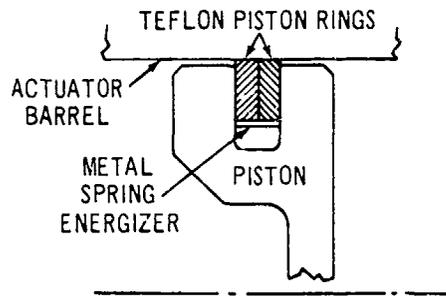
Typical Piston Seal for Flight Control Actuators
